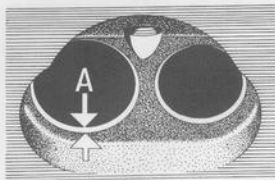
Valve seat width $A=2\text{ mm (0.08")}$
